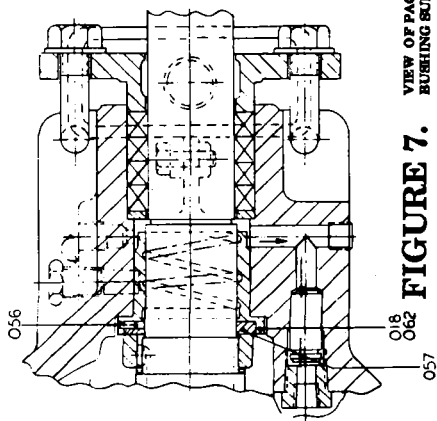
VIEW OF PACKING PUMP WITH BUSHING SUB ASSEMBLY
